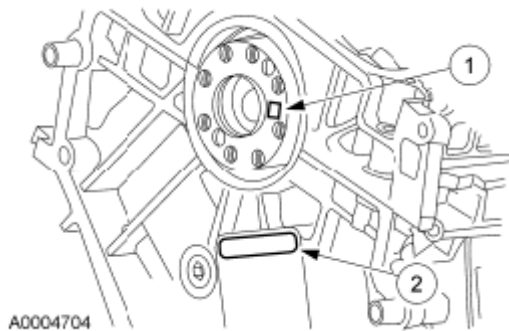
Identifying Crankshaft Flange & Cylinder Block Rear Face
